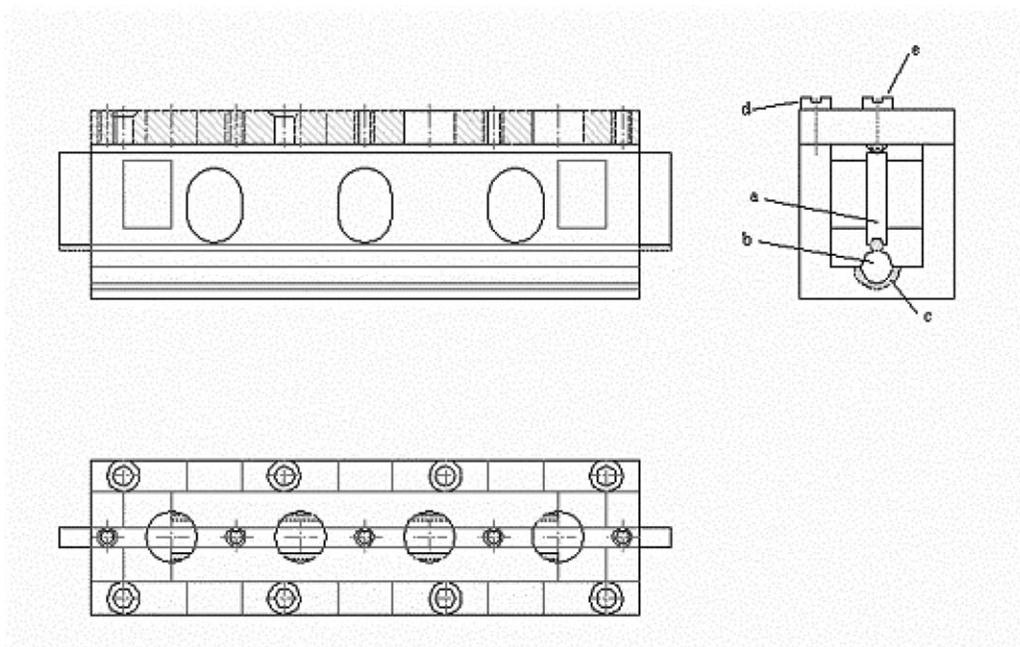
Scheme of the device used for welding the Pd-Ag tubes.
